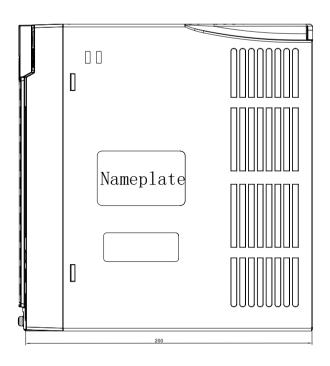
WD-50B2-I, WD-75B2-I series side installation dimension
